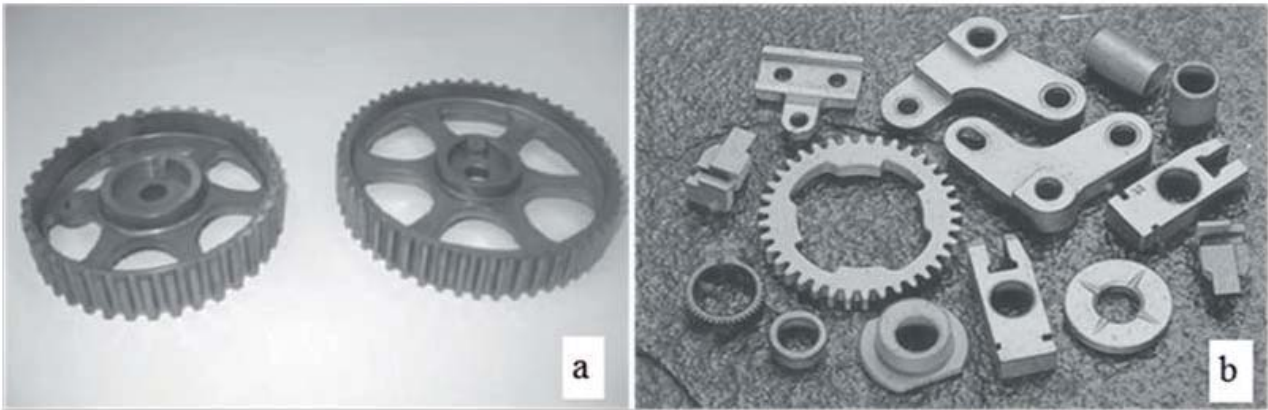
Parts manufactured by PSM: a) distribution pulleys, b) fuel pump parts
